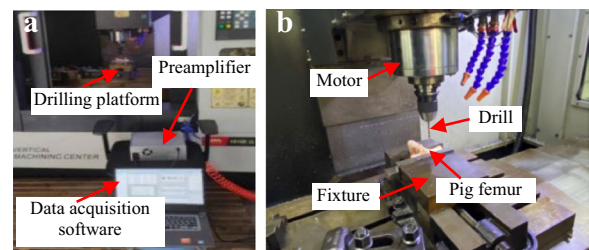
Site layout drawing of drilling test: a Front view and b left 45° view
